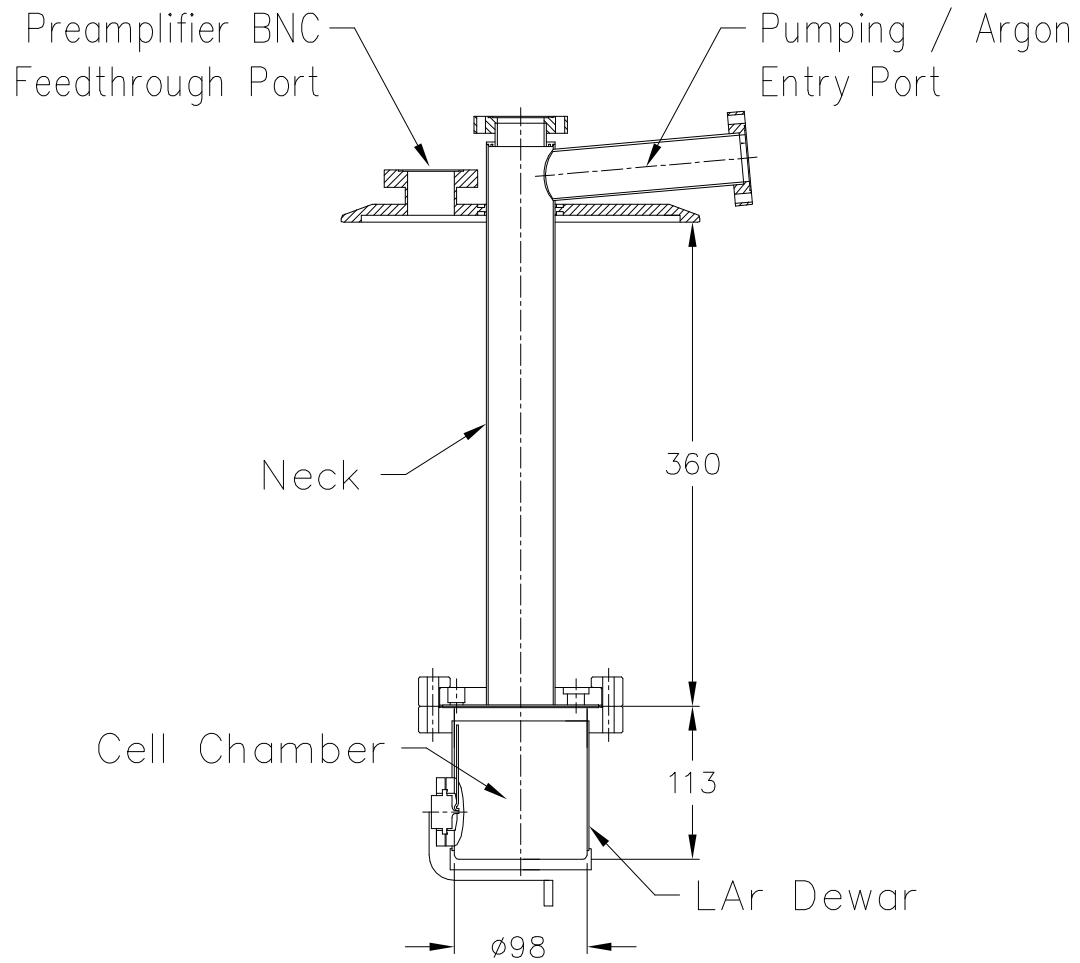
Elevation view of the liquid argon dewar assembly. All dimensions are in millimeters.
